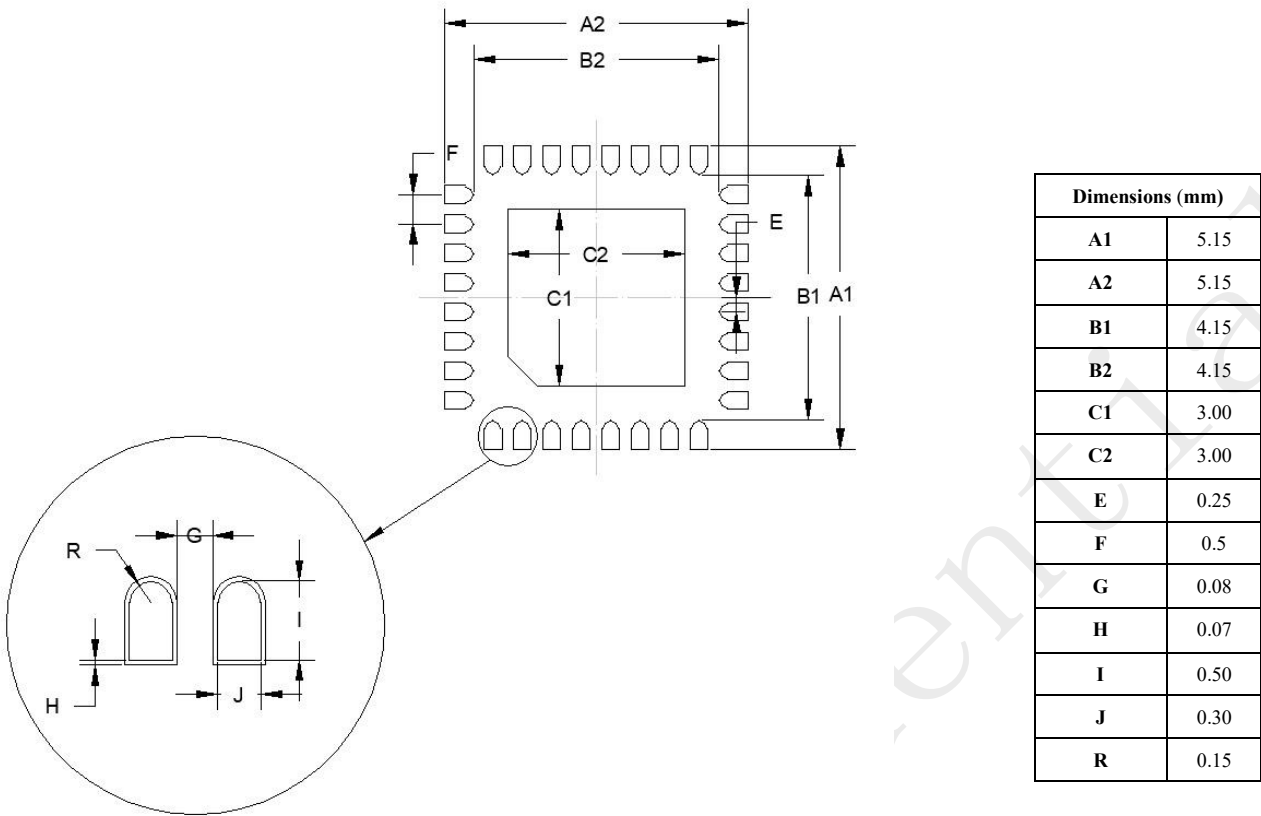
SOLDERING FOOTPRINT RECOMMENDED (QFN32)
